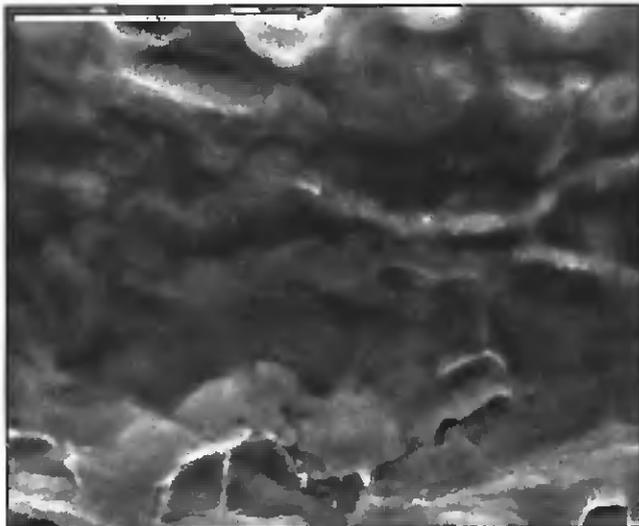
Close-up of the kissing bond in a longitudinal weld specimen in AA6082.
